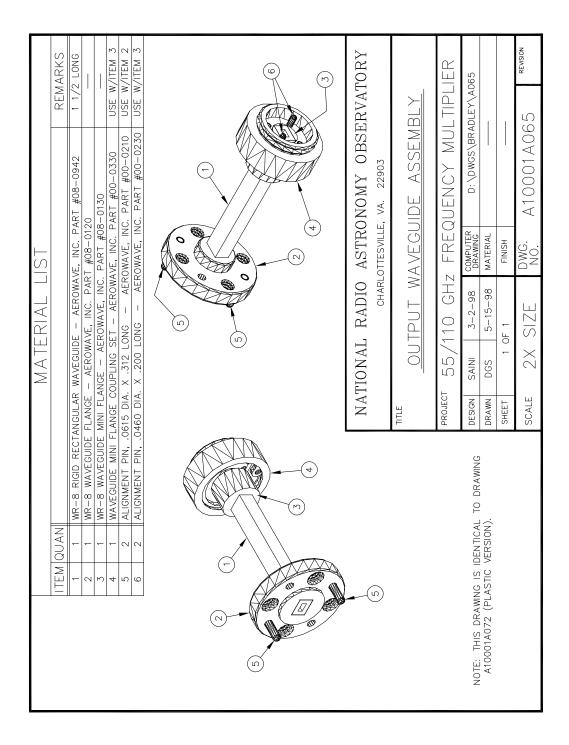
55/110 GHz frequency doubler: WR-8 output waveguide flange adapter assembly.
